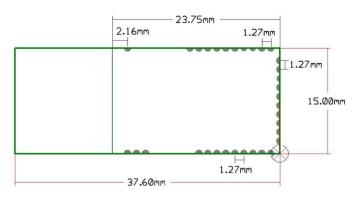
SIGFOX-MOD1/2-C/E dimensions, all dimensions in millimeter
